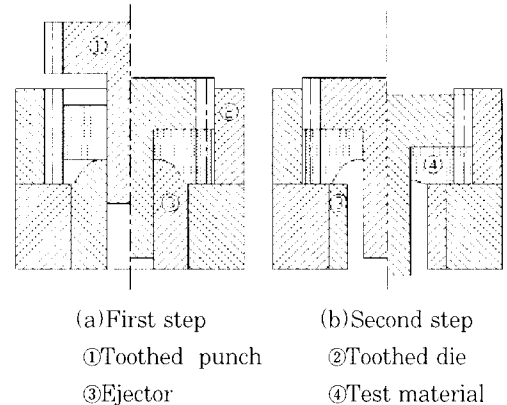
Die design schematics for the steps precision-forging of a spur gear
